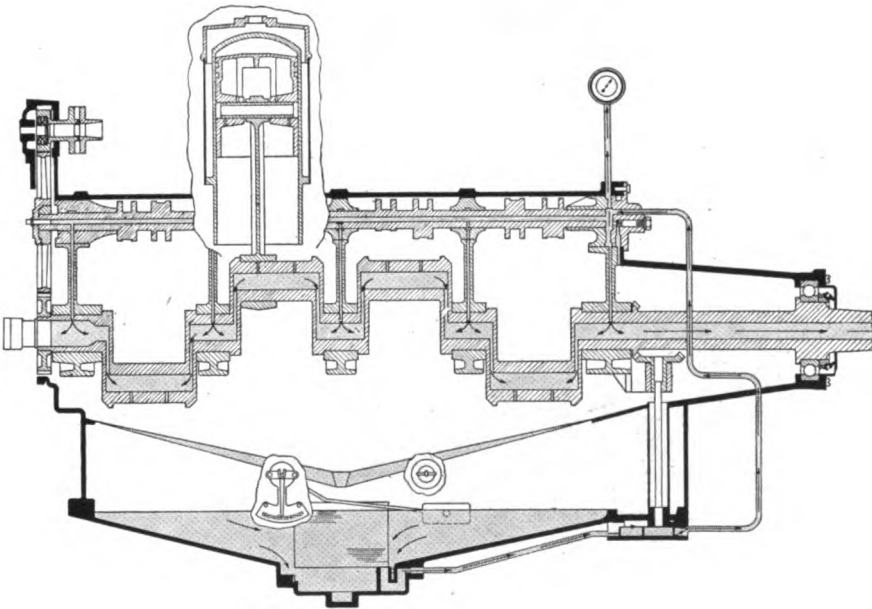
Lubrication chart of Curtiss OXX-6 engine.
